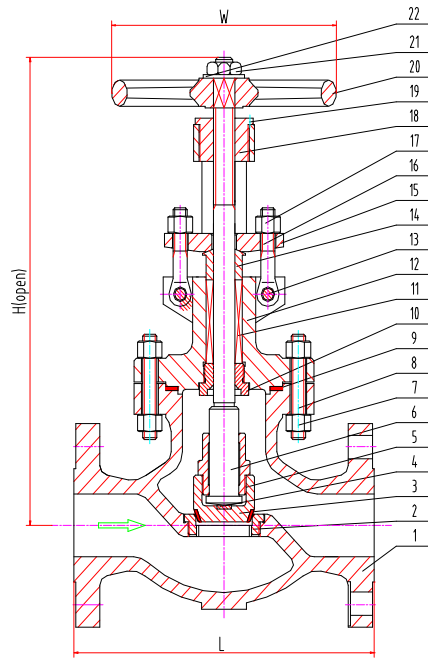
150LB/300LB GLOBE VALVE STRUTURE
